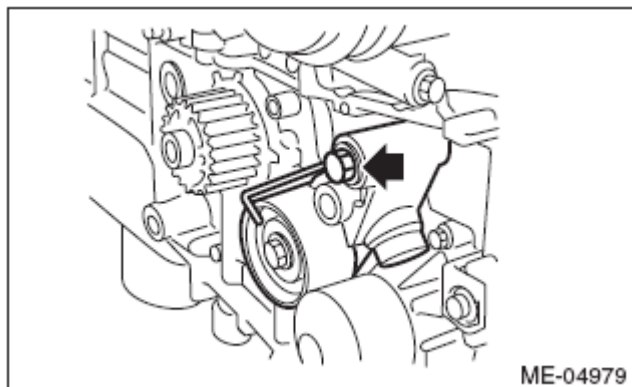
Locating Belt Idler No. 2 Mounting Bolt
